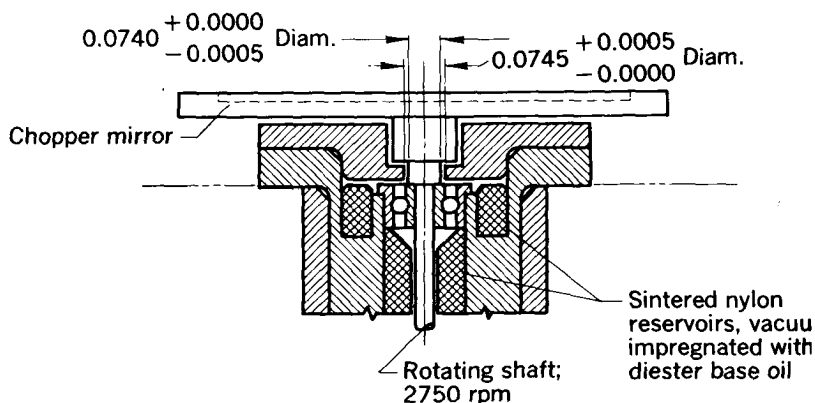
Radiometer spindle assembly. (From ref. 6.)
